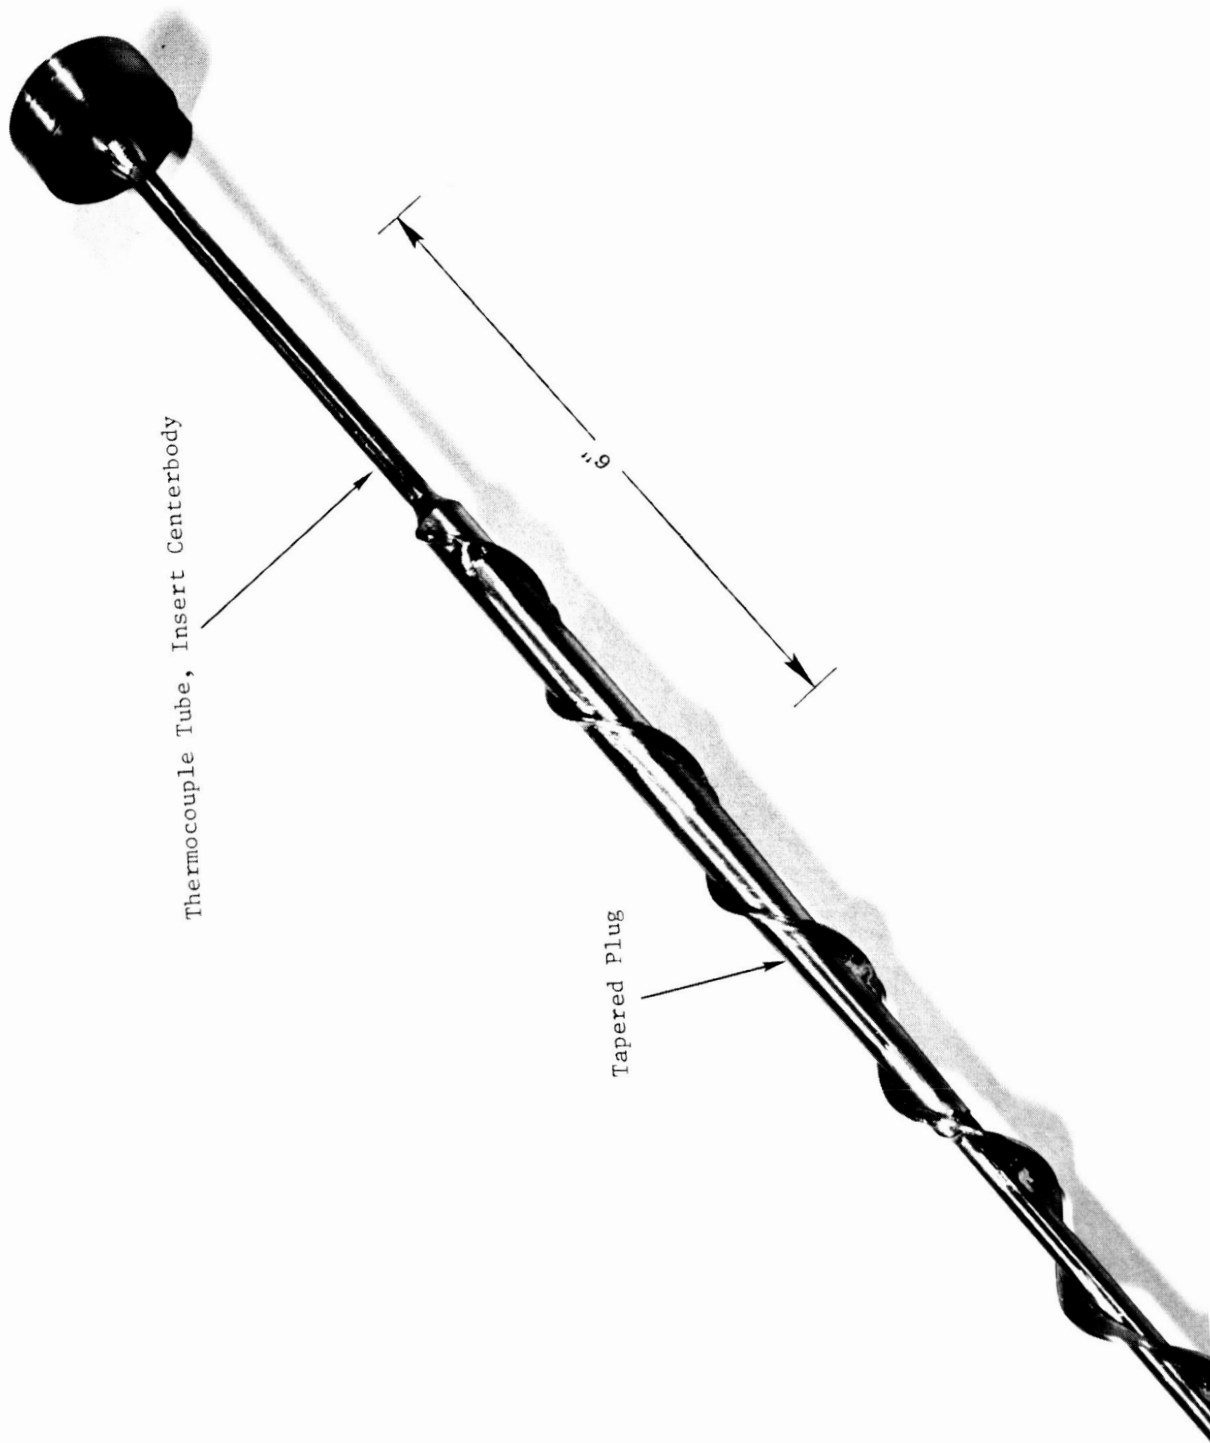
Helical fin boiler tube insert for boiler 1.
